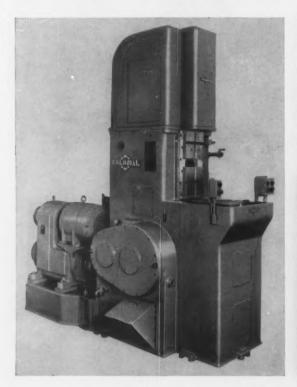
"One-Way" surface broaching machine built by the Colonial Broach & Machine Co.
